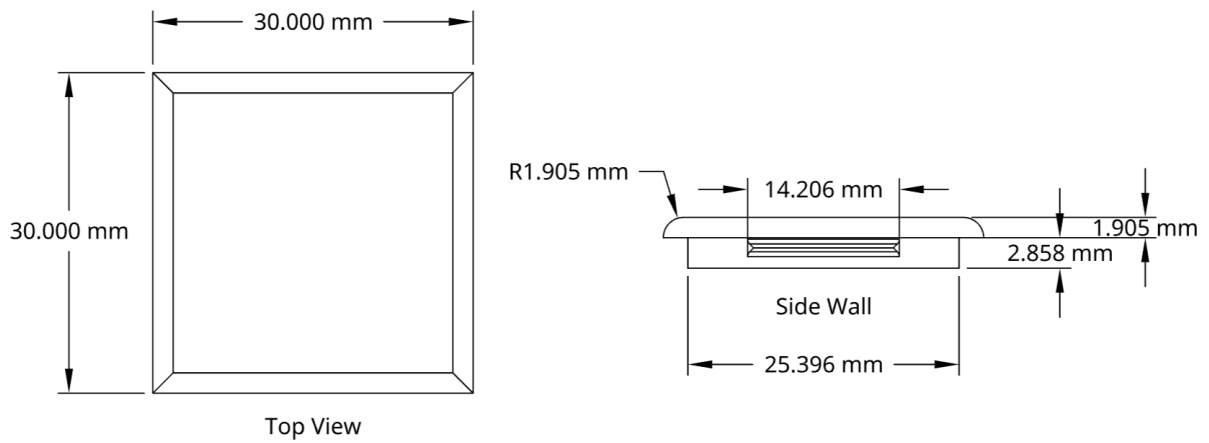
CAD Drawing of Top Side Wall of Lid with Dimensions
